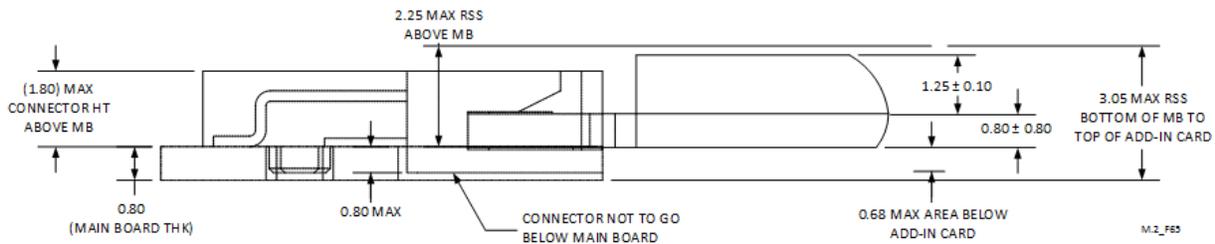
Stack-up Mid-mount (In-line) Single-sided (S2) Add-in Card for 1.35 Maximum Component Height
